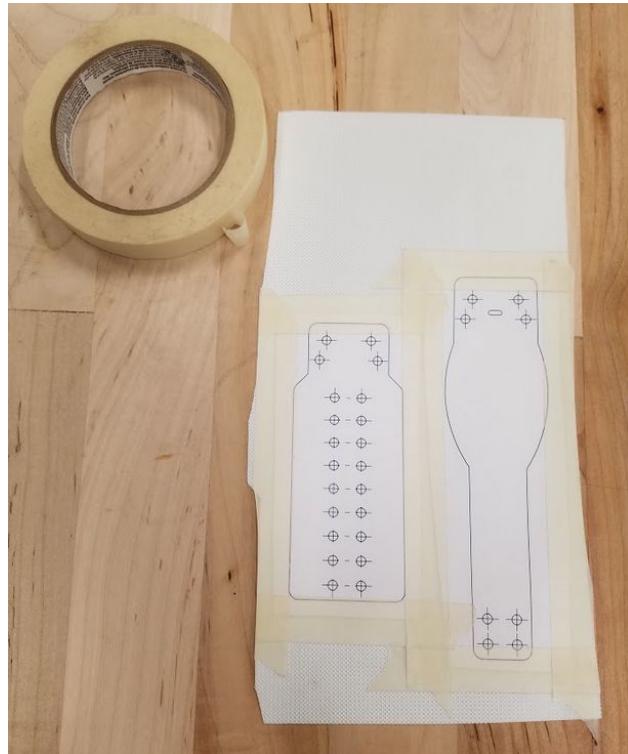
Trimmed Drawings Taped to Raw Belting Material
